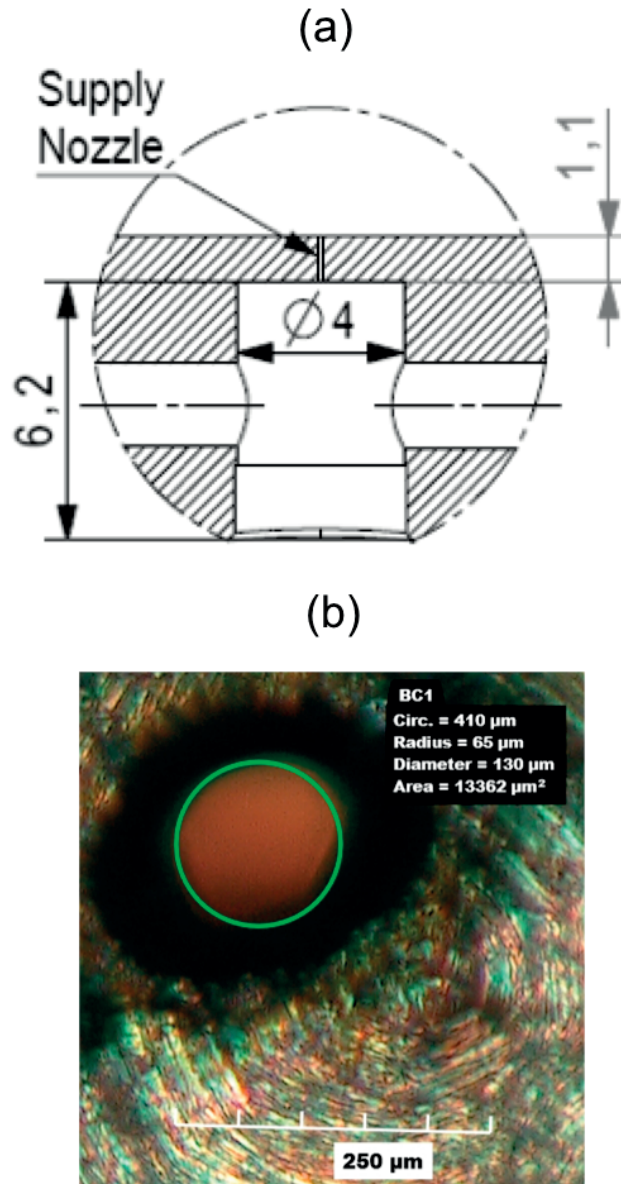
(a) $\varnothing 0.1$ mm bearing supply nozzle geometry (dimensions in mm), (b) nozzle and tap inspection and measurement using digital microscopy.
